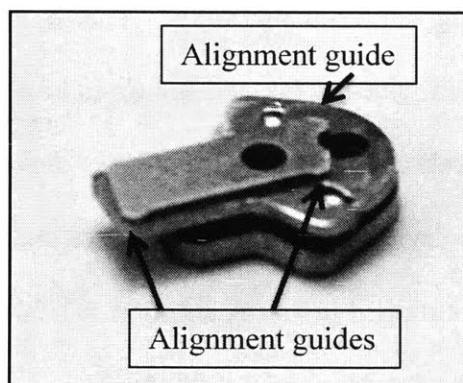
Alignment guides on the back side of the groove mount; three points kinematically locate the groove mount to the edges of the universal mount
